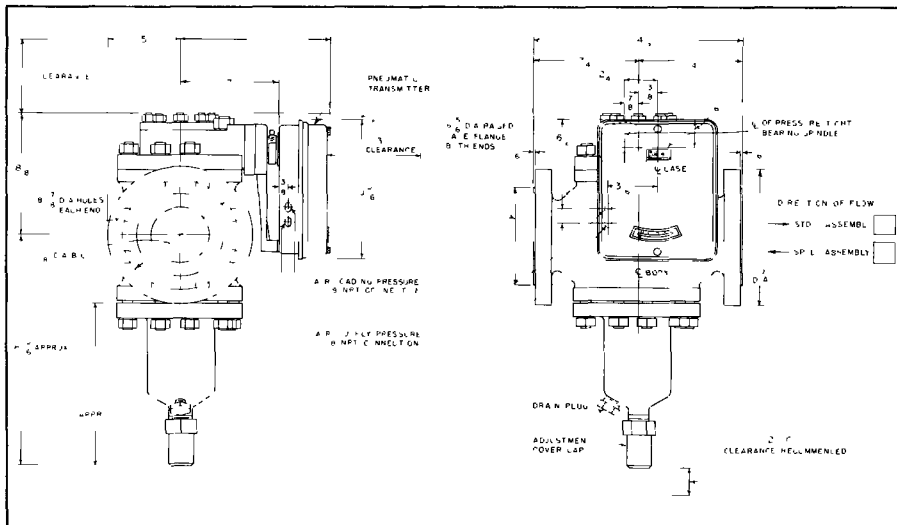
Mounting Dimensions, 4 inch Area Meter, 250 psi (Type JR132A)
